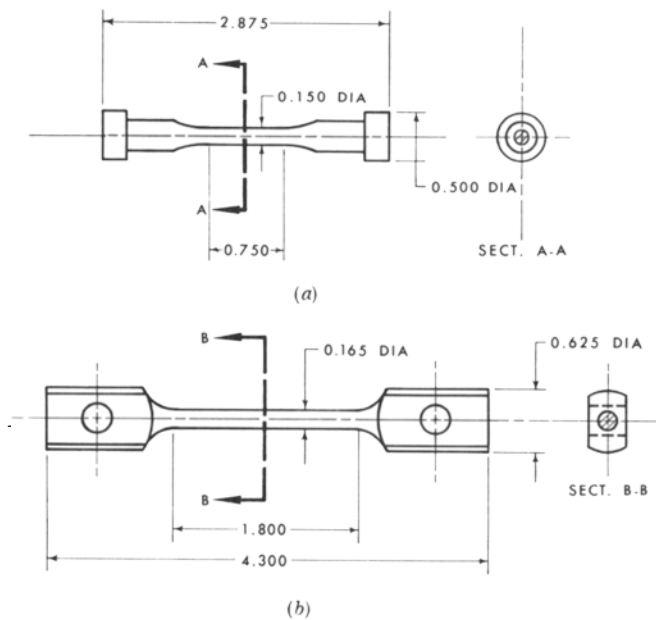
Specimen design for tests at (a) 60,000 cpm and at (b) 2 to 600 cpm.
